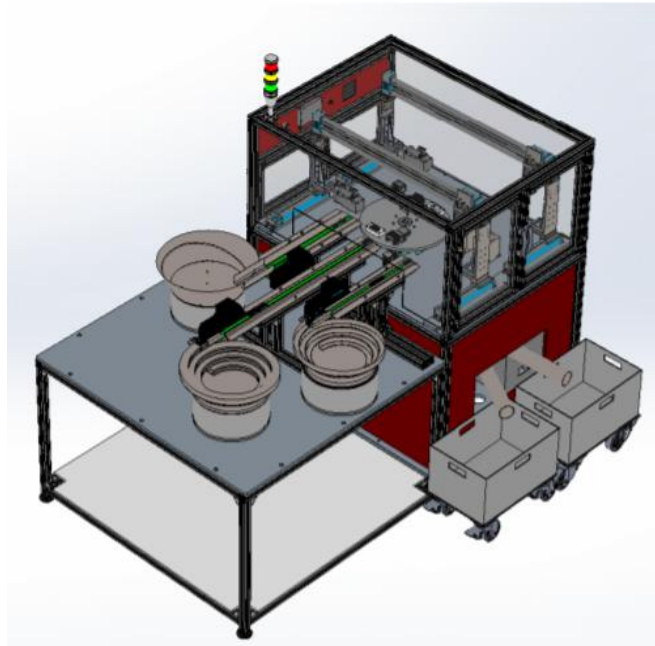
Automated Assembly Machines for the Harness Connector (Veigaa, et. al, 2019)
